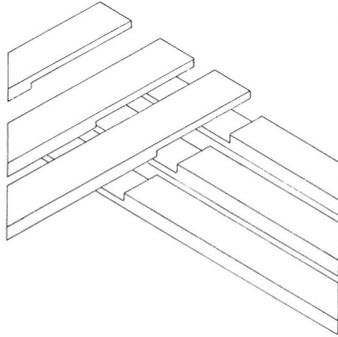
Planking of tops. Method of forming rebates for the top planking.
